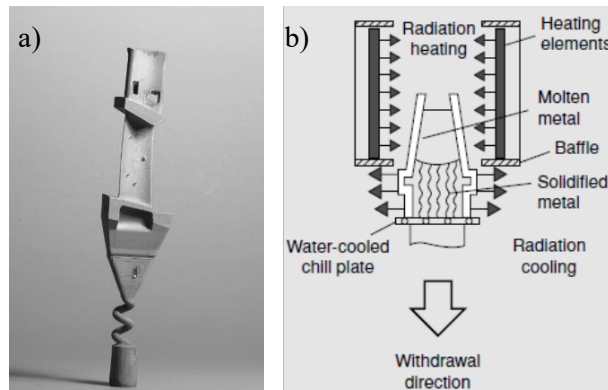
a) Single-crystalline turbine blade; b) schematic of the Bridgman furnace process
